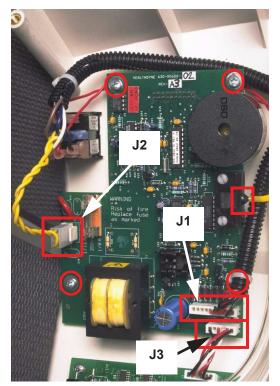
FIGURE R: CONNECTIONS AND MOUNTING SCREW LOCATIONS
